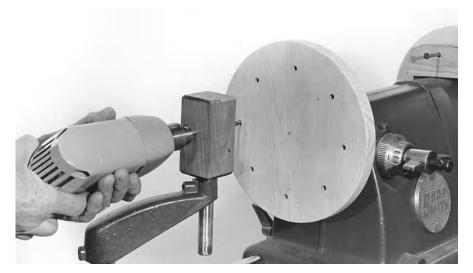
The guide pin holder is mounted this way. Drilling mounting holes in power plant cover will not damage the machine. Be sure the guide pin and the auxiliary spindle have a common vertical centerline.
